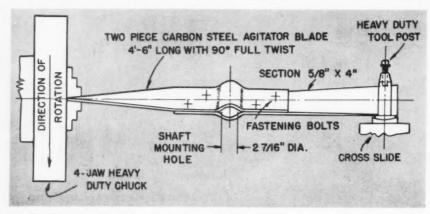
Sketch showing setup for twisting agitator blades on a heavy duty engine lathe.
